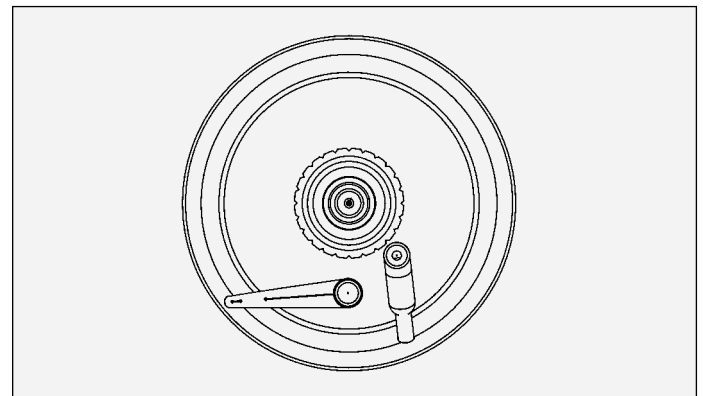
Brush and Feed Tube Positioning (Viewed from rear of bell cup)
